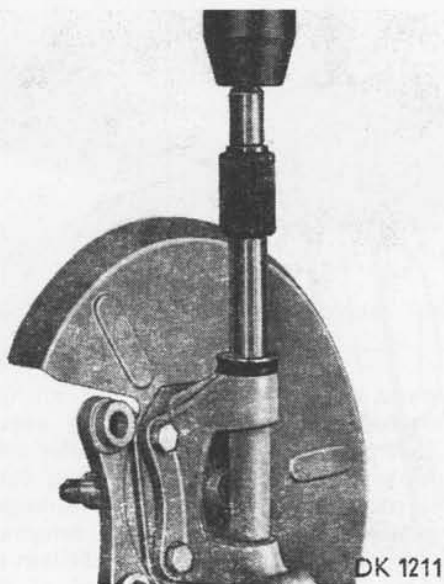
/3 - Pressing in and out King Pin Bushes Using MO 6-135 Pressing Mandrel
